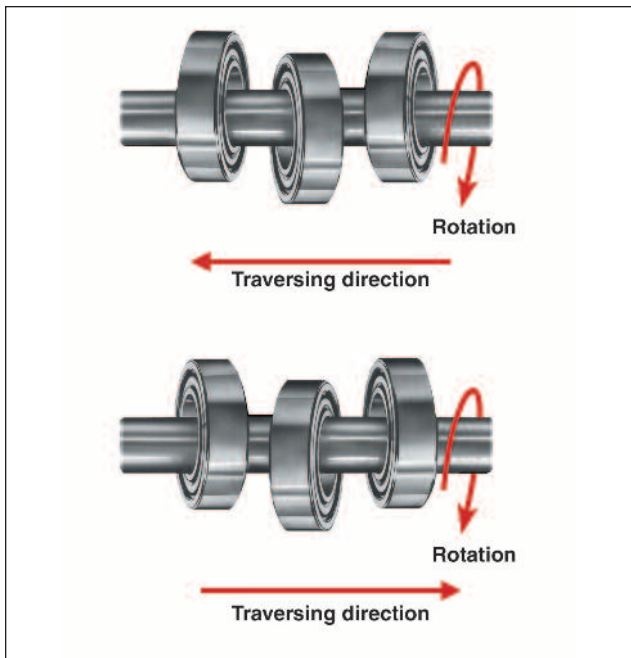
The traversing direction of a rolling ring linear drive is determined by the angle of the rolling ring bearing assembly relative to the shaft. This is true regardless of the rotational direction of the motor. Pivoting the ring assembly is mechanically controlled by the reversal mechanism located on the linear drive.
